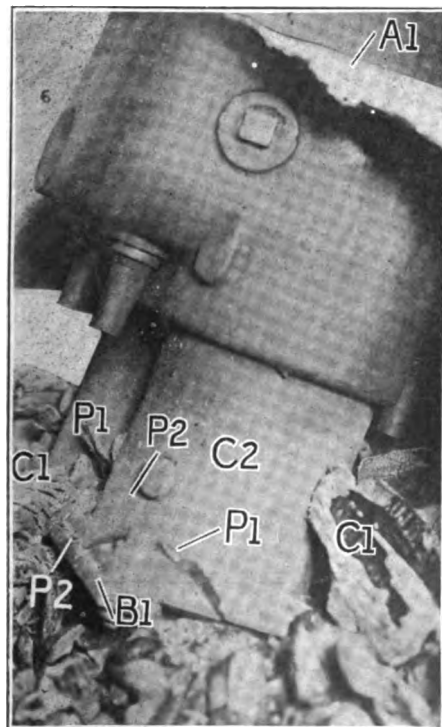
Showing lug bolted to cylinders and V-shape groove cut; the charcoal fire around can be seen.
